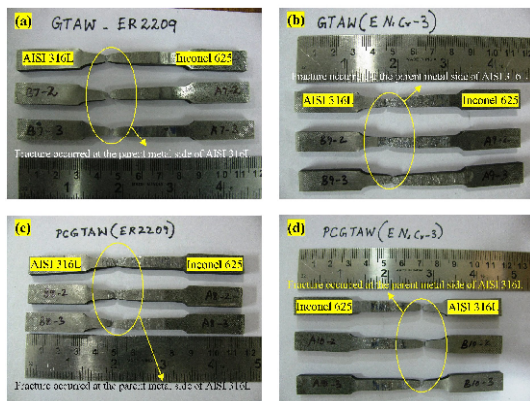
Photographs of fractured tensile samples of CCGTAW employing: (a) ER2209; (b) ERNiCr-3 and PCGTAW employing; (c) ER2209; (d) ERNiCr-3 filler metals, respectively.
